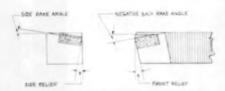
Important angles of a single-point tool are shown here. But, changing the tool's position in the tool holder can change these angles. (Baker and Kozacka)
